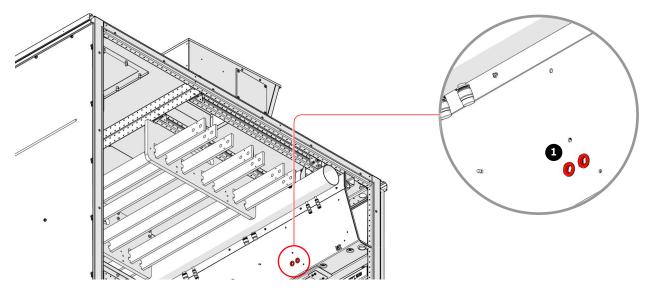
Cable duct openings (example with 1700 mm PCU)
